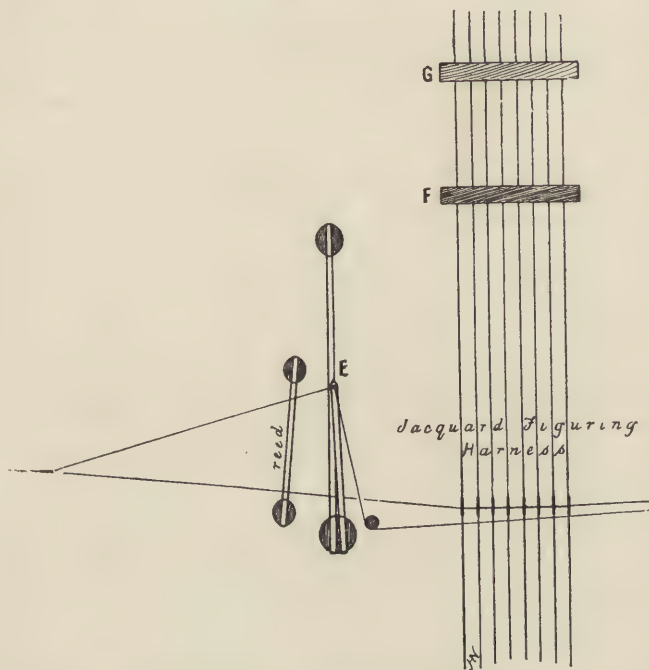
Part Sectional End Elevation of a Loom for weaving "Madras" Muslin Fabrics.
